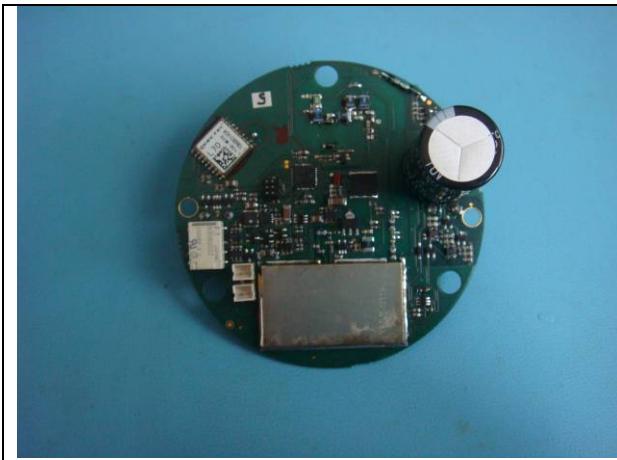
The PCB after leakage and immersion tests. There is no water ingress.
